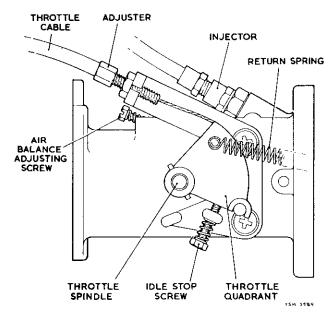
THROTTLE BODY-ADJUSTMENT POINTS
